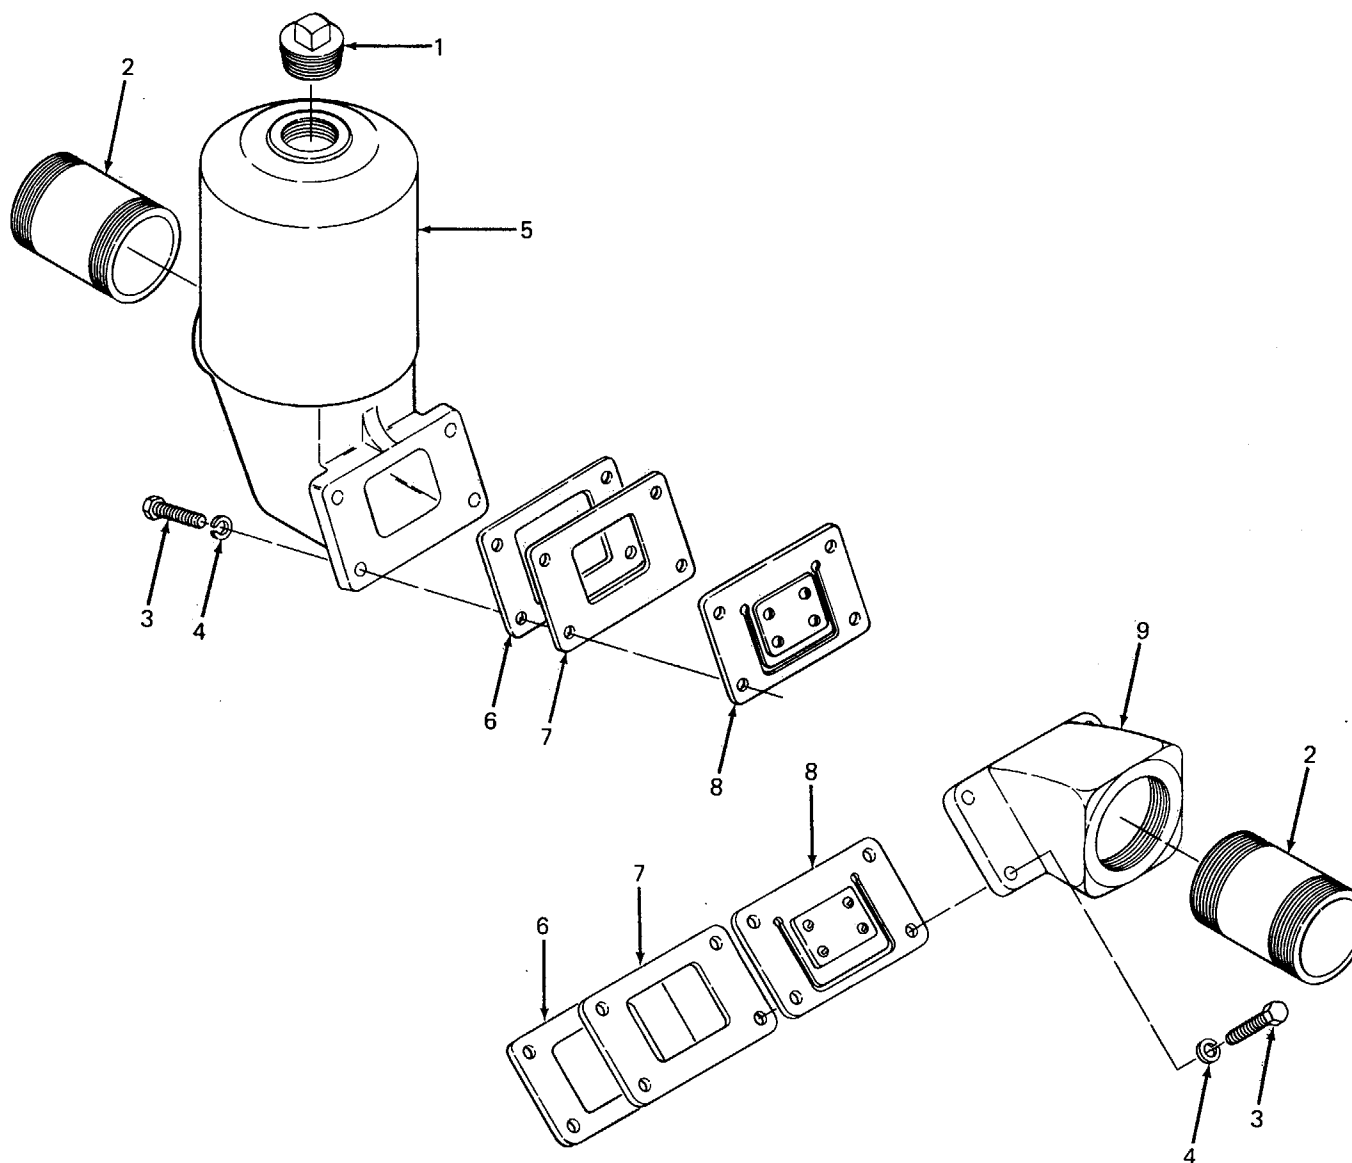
Accumulator, Check Valve Assemblies, and Discharge Port.
